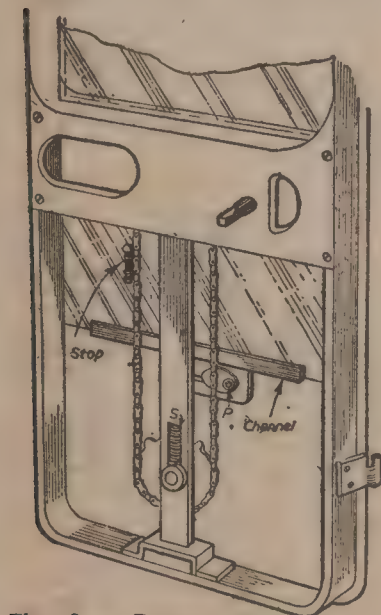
Door panel has been removed to show working of the winder mechanism.
